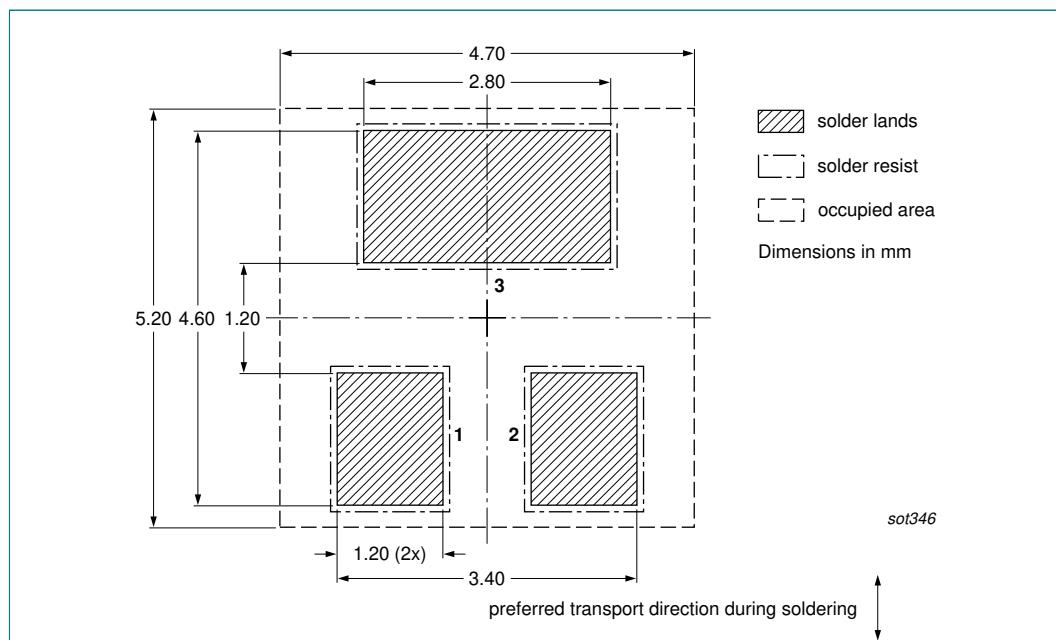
Wave soldering footprint SOT346 (SC-59A/TO-236)
